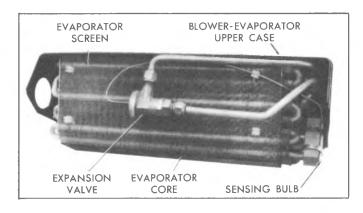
B-50-Expansion Valve (C-K Overhead System)
